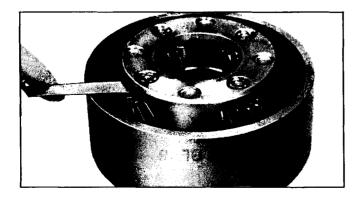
E-145 Checking Reaction Carrier Pinion End Play
